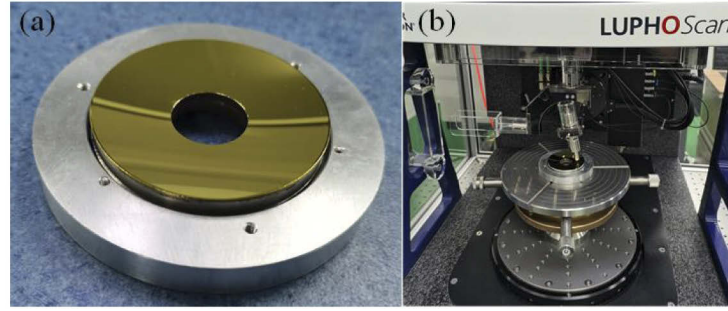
(a) The mirror assembly is installed in the workpiece setup, (b) surface shape testing by LUPHOScan 260.
